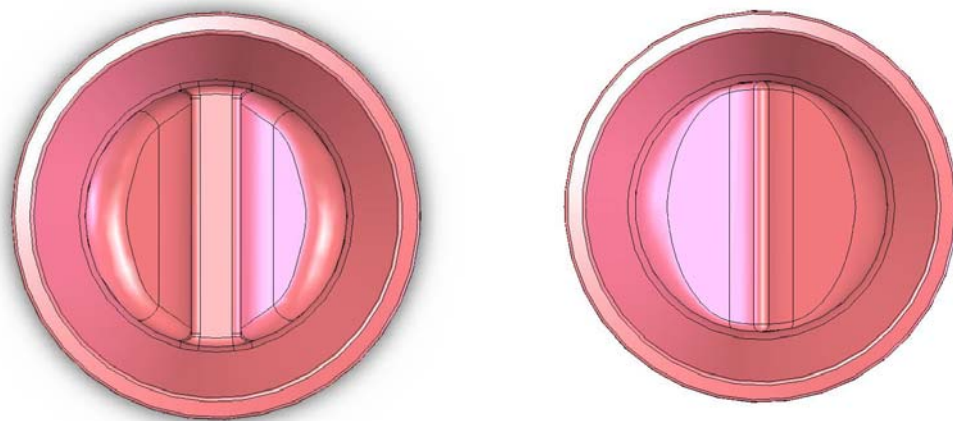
Proximal view, or outlet, of valve (left) and distal view, or inlet, of valve (right), prior to cutting orifice.
